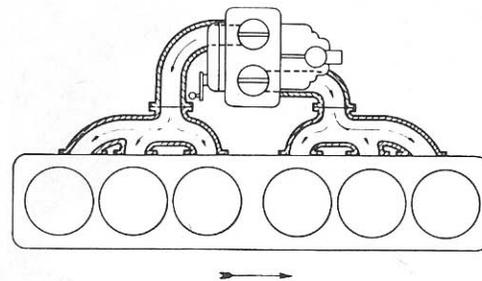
Single carburettor fitted to a six-cylinder in-line engine (Sec 1)
